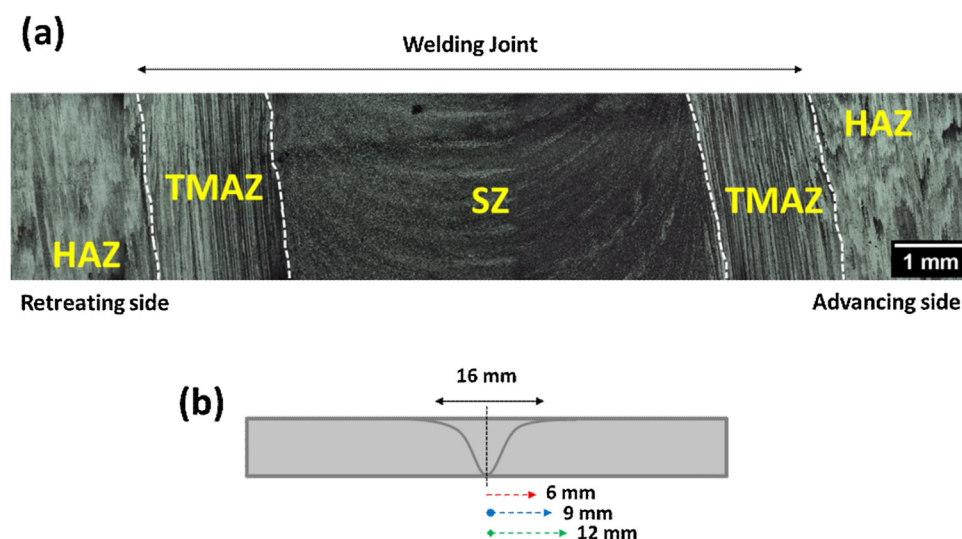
(a) Optical microscopy of the friction stir weld showing the welding zones; (b) schematic diagram showing the position of the thermocouples during the welding process.
